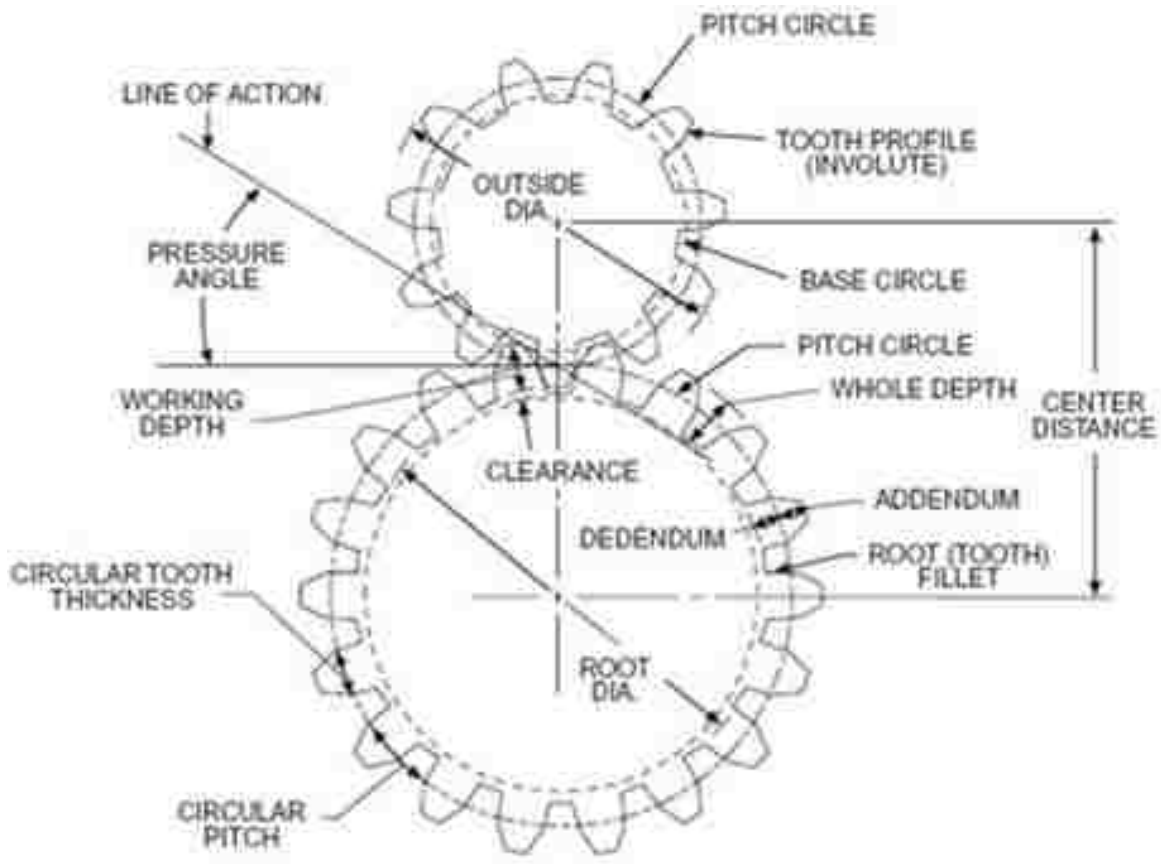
Drawing of Center to Center Distance of spur gears [35].
